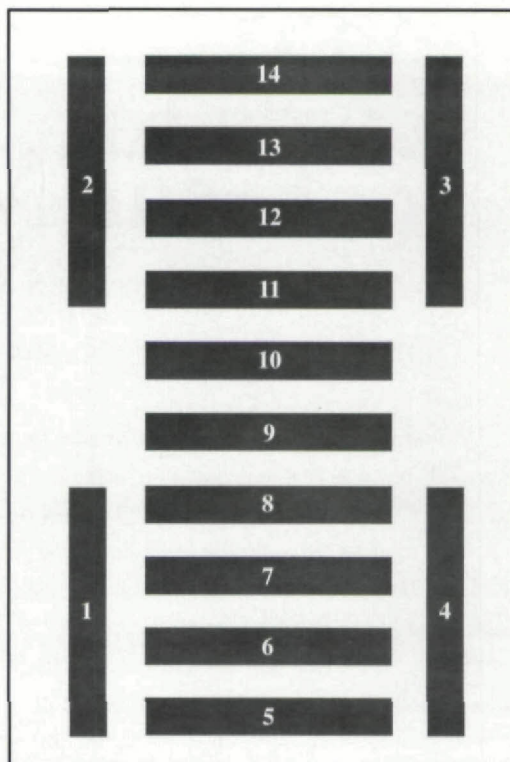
Arrangement of 20" spur gears in carburizing furnace.
